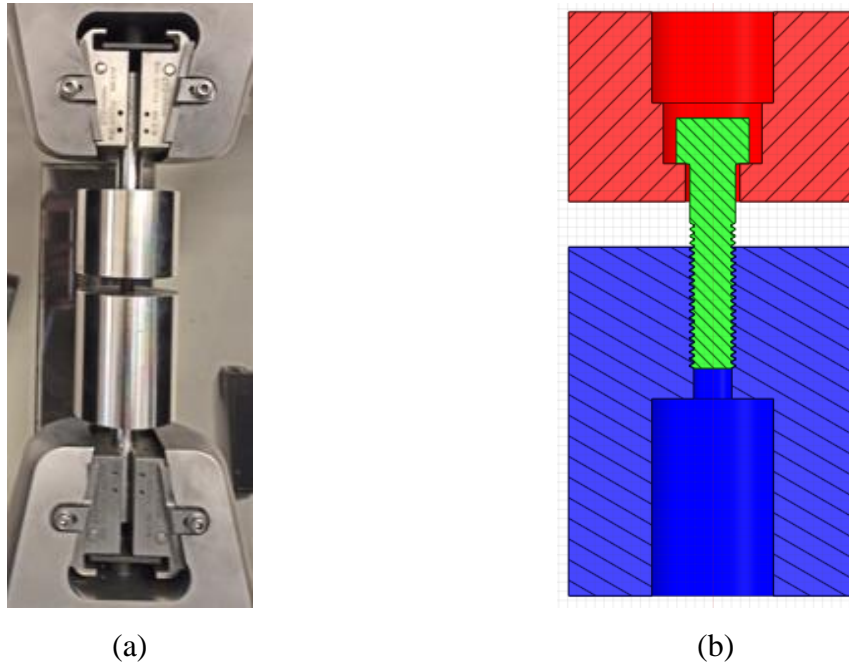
The views of the test configuration of the bolt tensile test, (a) assembly at the tensile test machine, (b) section view of the test setup.
